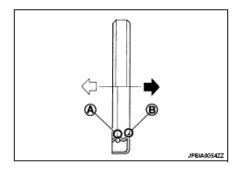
Fitting Front Oil Seal Courtesy of NISSAN MOTOR CO., U.S.A.
